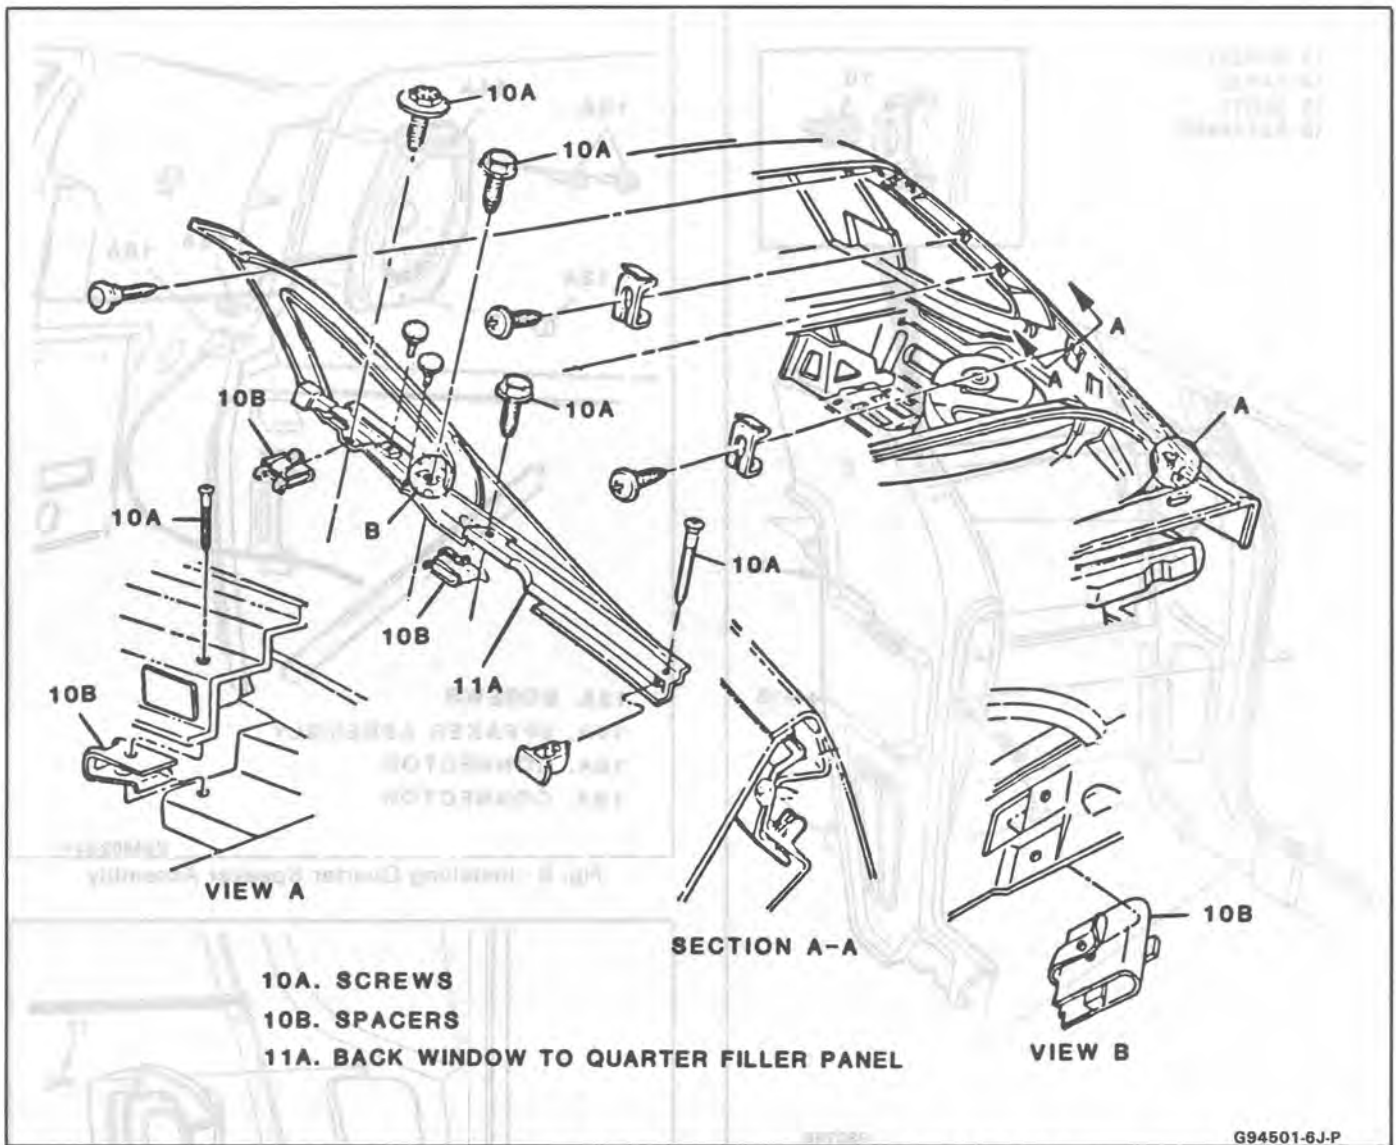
Installing Back Window to Quarter Filler Panel - 97 Style
